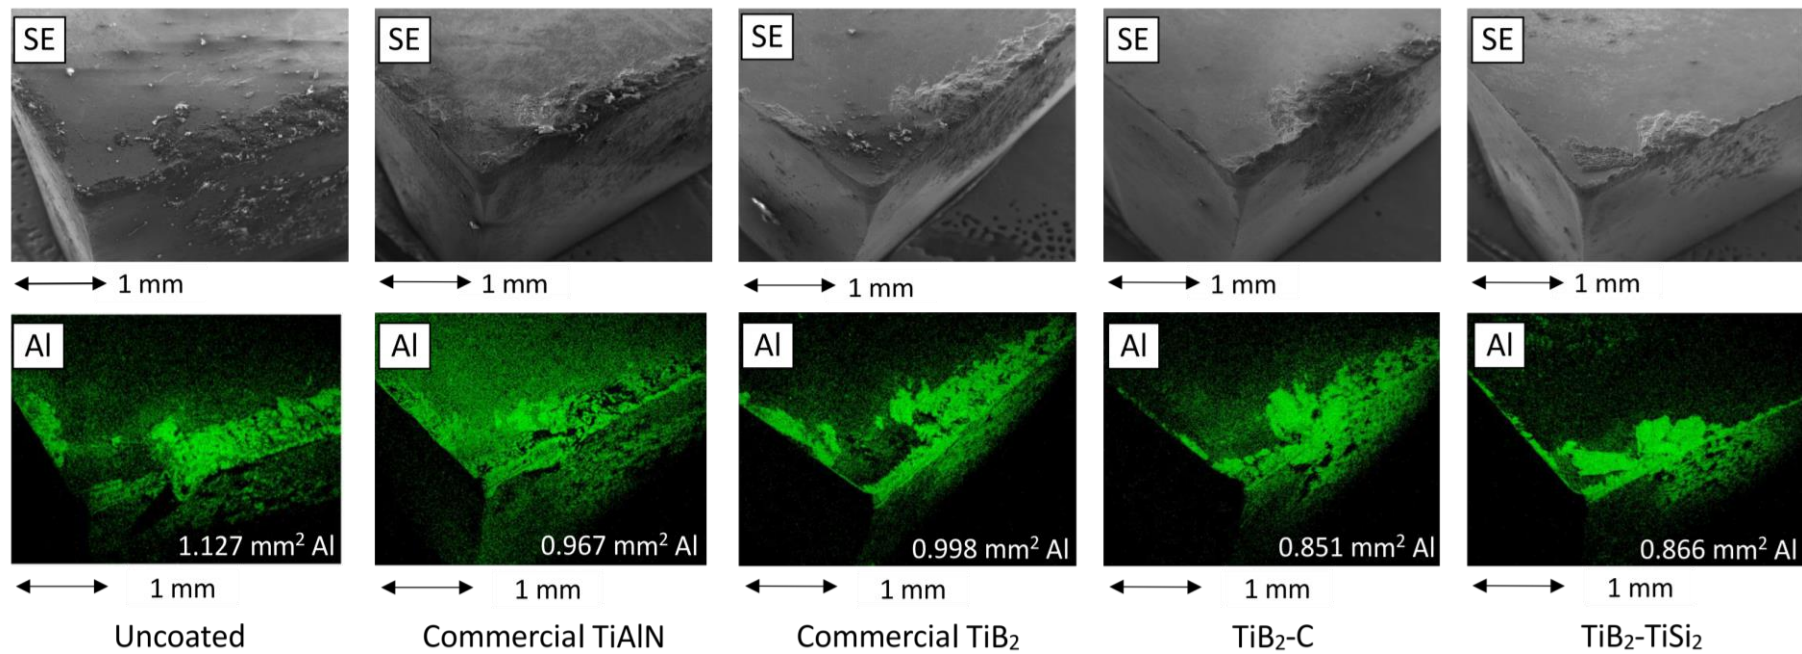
Aluminium element mapping images of the flank face of coated mill insert after dry face milling of Al-10Si alloy. Element mapping obtained with EDX mode of SEM.
